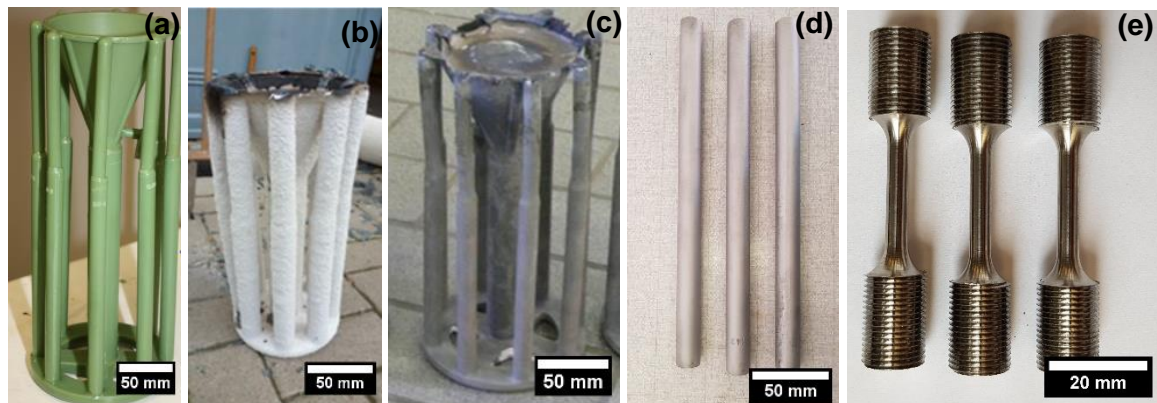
(a) Wax tree pattern for rods. (b) Ceramic mould after burnout. (c) Ti6Al4V mould after shell removal. (d) Ti6Al4V investment cast rods. (e) Investment cast tensile specimens
